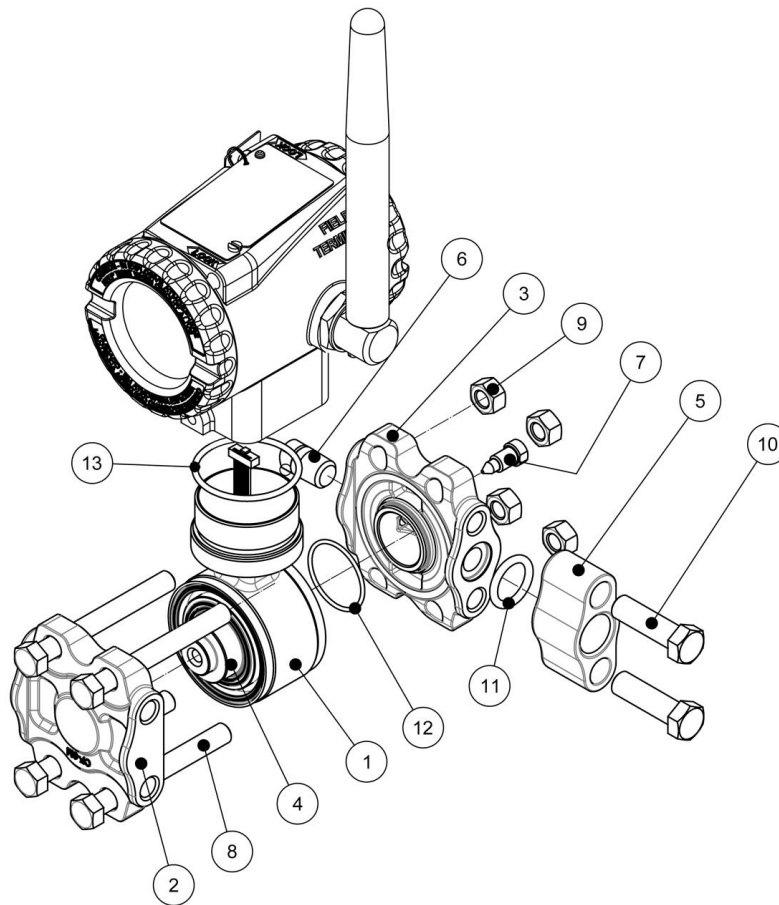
shows a transmitter exploded view and will help you to visualize the following.
